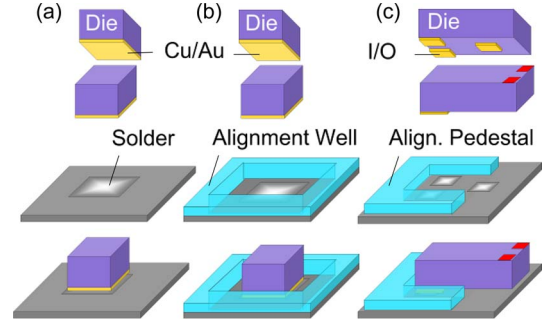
Self-assembly of dies using (a) solder-based alignment alone, (b) alignment wells, and (c) alignment pedestals that allow for both single-angle orientation and flip-chip assembly with multiple I/O connectivity.
